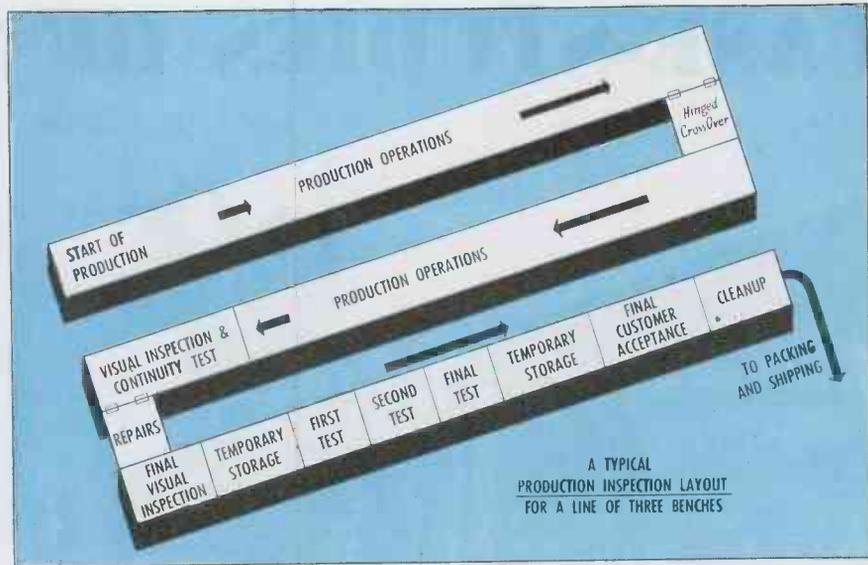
Enough room for inspection, testing and repair operations should be planned
